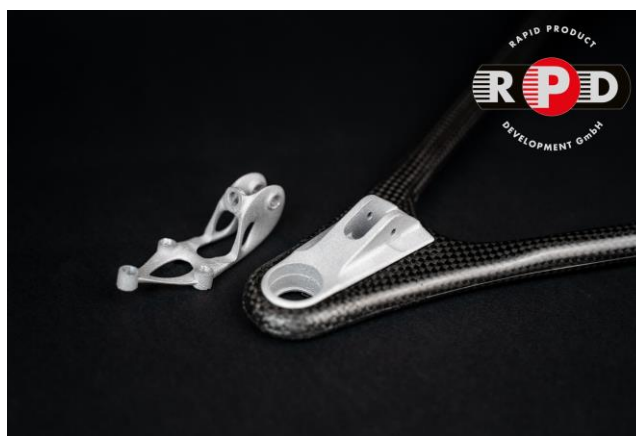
Custom carbon fibre wishbone layup incorporating a machined aluminium bearing cup by TU Wien Racing.
